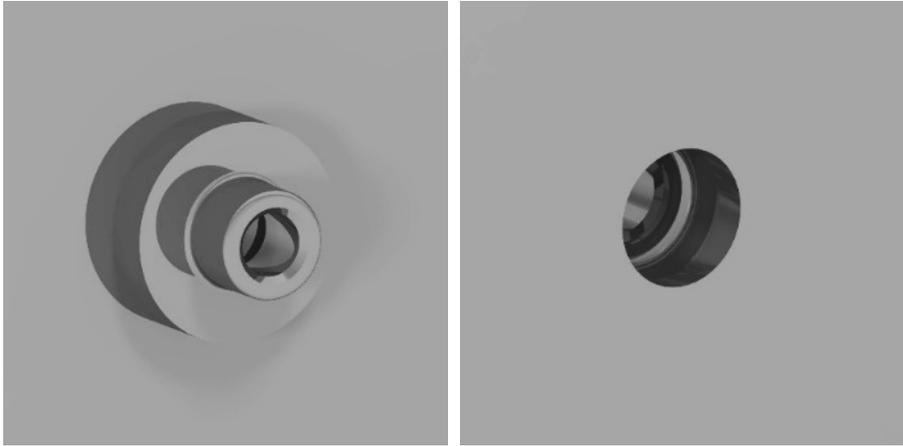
Rendering of weld nut shown from the back of the car body (left) and the front (right).
